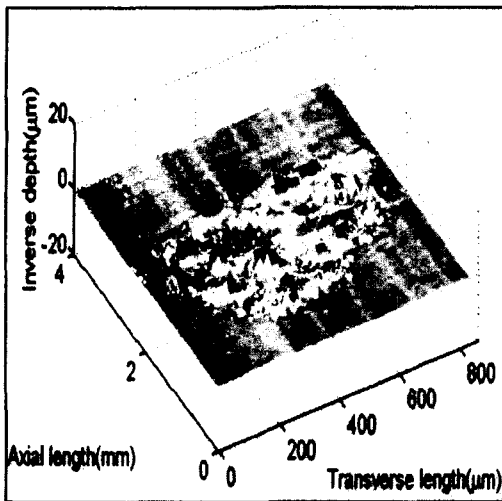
Fretting Wear Configuration of the Original Shape Grid Spring by Axial Fretting Wear Test
